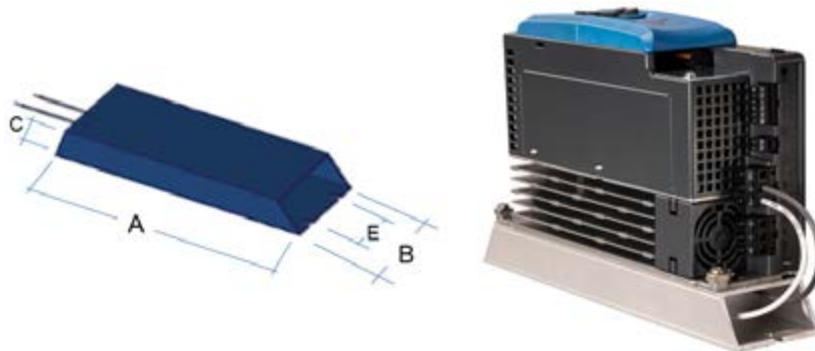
Dimensioning and assembly of SK BRU5-... on SK 5xxP
